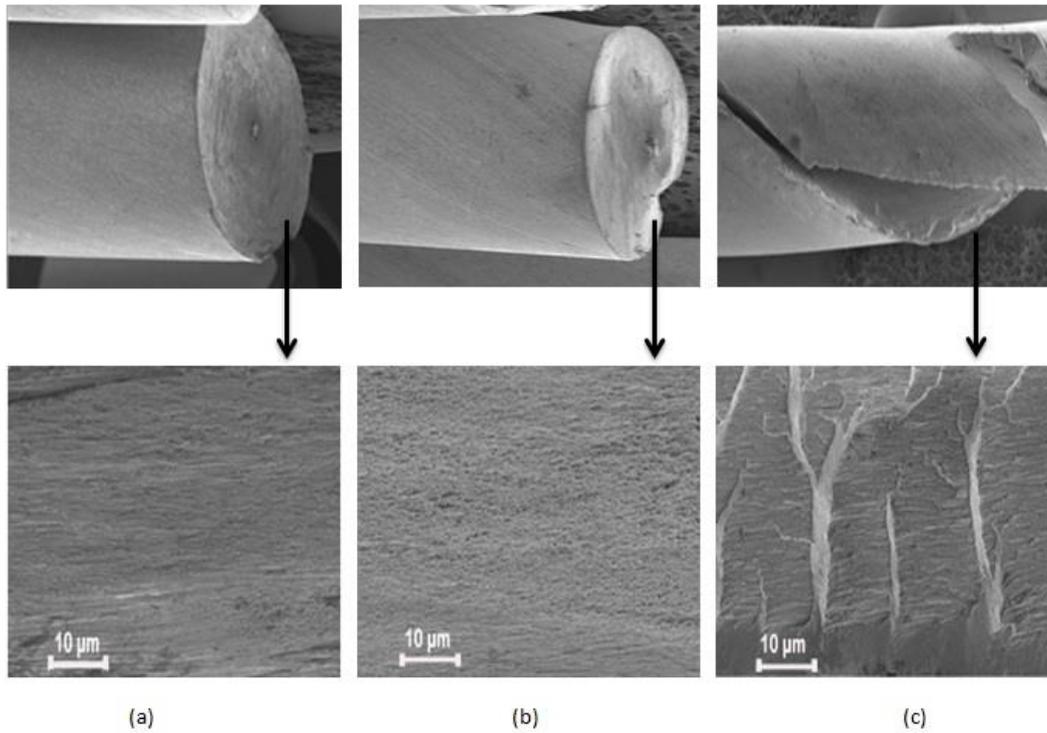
Fracture surface of drawn wire for sample B at various drawing strain, ϵ (a) $\epsilon = 1.65$ (b) $\epsilon = 1.82$ (c) $\epsilon = 1.99$
